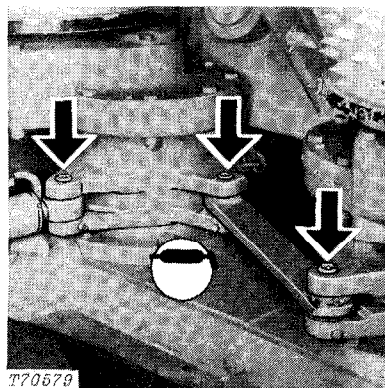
Feed Roll Cylinder Rod End Pivot and Feed Roll Crosslink (3 Points)
